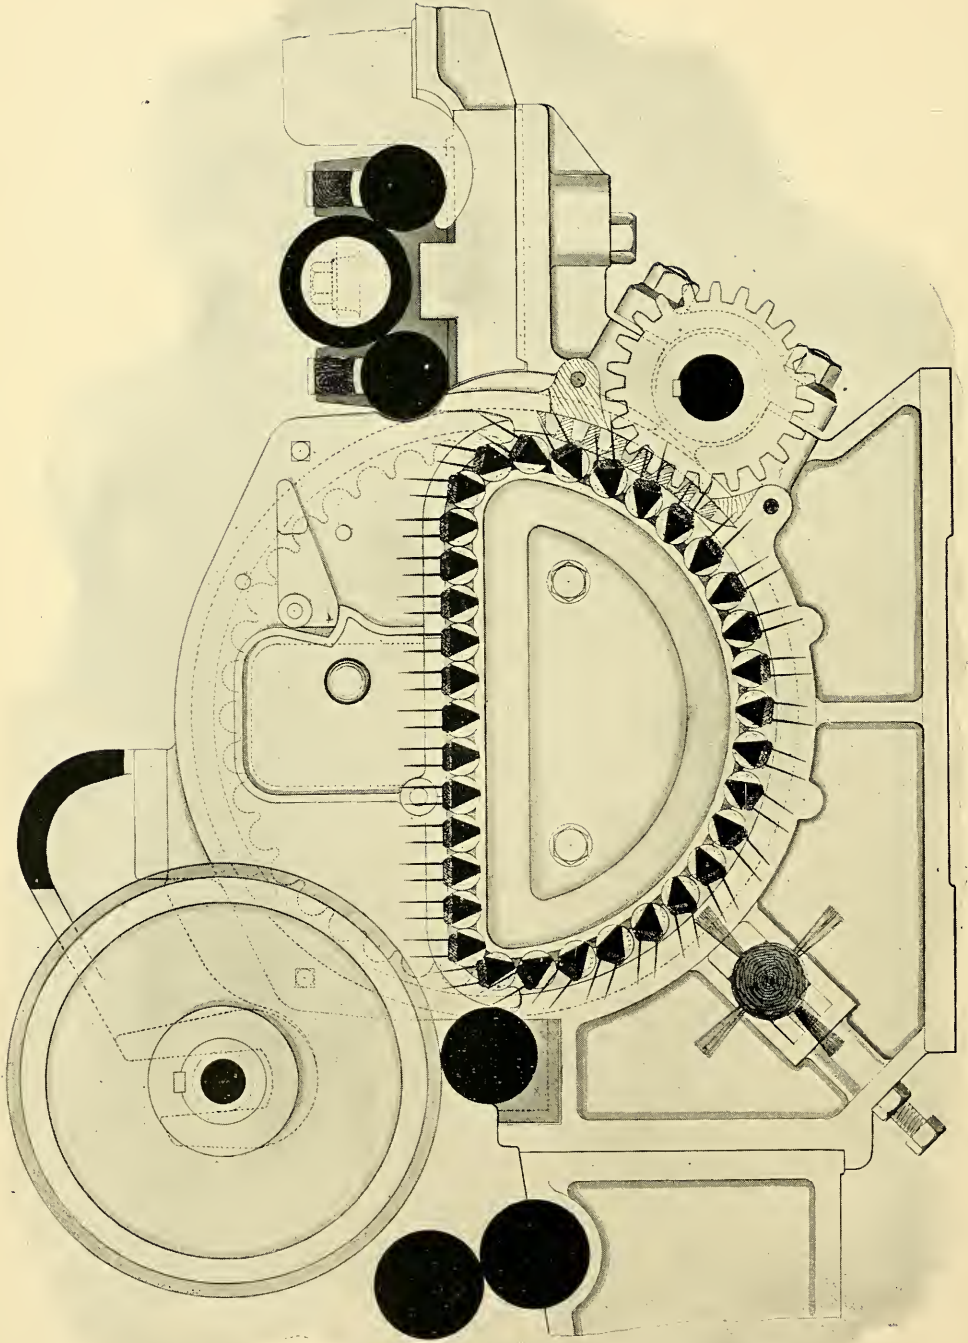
Section through bars of Fraser's patent "ring" drawing frame for jute.
